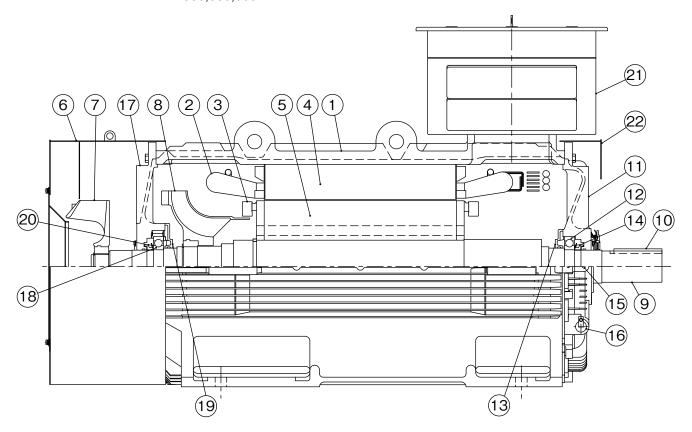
Section Drawing of Horizontal foot mount (Frame size 500~630)
